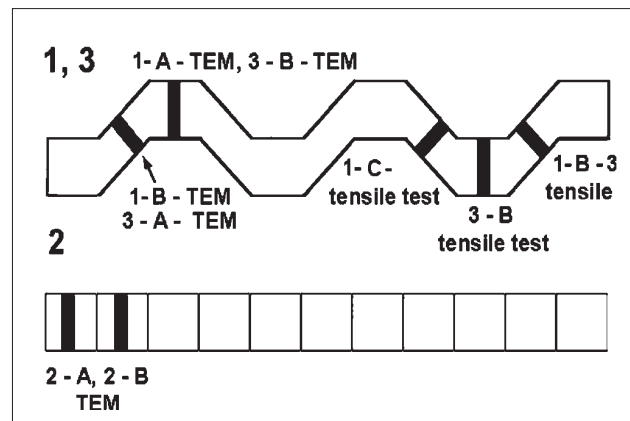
Schematic illustration of CGP plate for selection of TEM and tensile test specimens.
